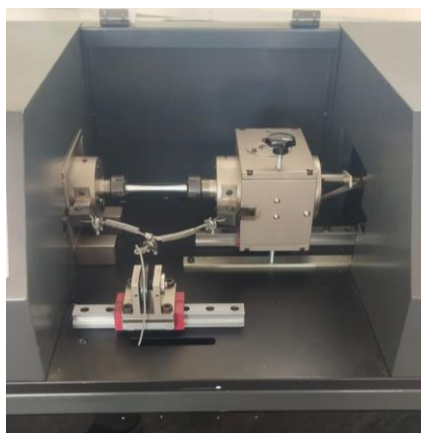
FOUR POINT ROTARY FATIGUE BENDING MACHINE
